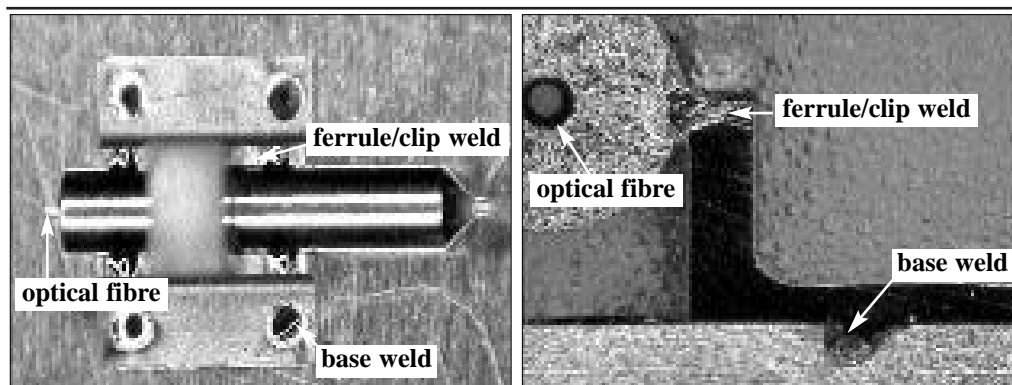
The left picture shows a plan view of the ferrule and clip assembly, with base welds and clips welds. The right picture is a cross section of one side of the ferrule and clip. Notice the fibre centered in the ferrule, this is 125  $\mu\text{m}$  in diameter. The base lap weld and the ferrule to clip fillet weld are shown. To avoid the tooling the beams are angled typically 25 degrees from normal; this angle is apparent in the base weld.
